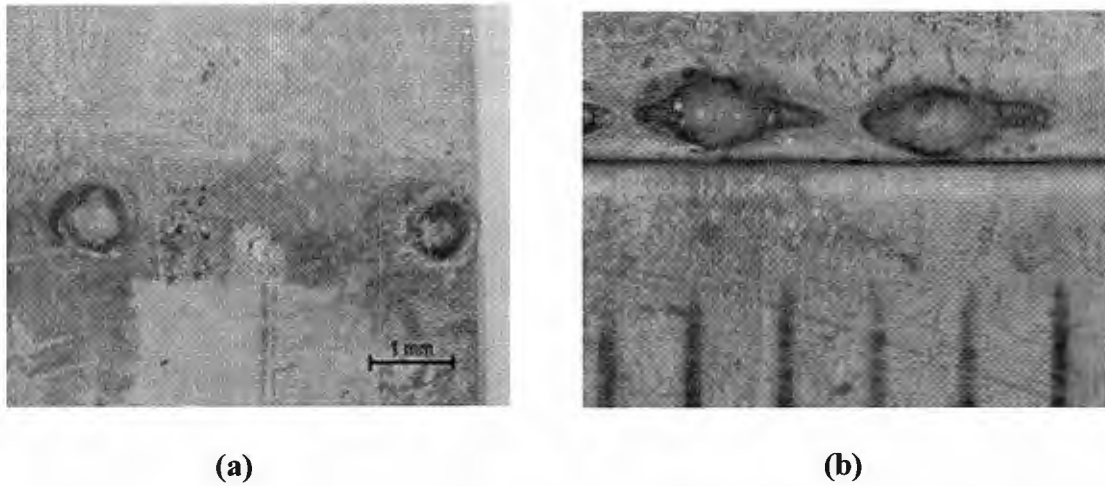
Rivet-shaped welds produced under welding speed (a) 7.62 m/min (300 ipm), (b) 5.08 m/min (200 ipm). Note that line spacing in (b) is equal to 1 mm.
